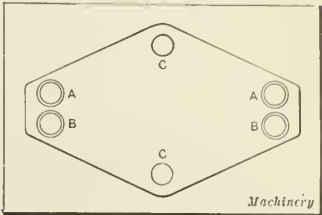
Small Piece machined by Use of Indexing Jig shown in Fig. 4
